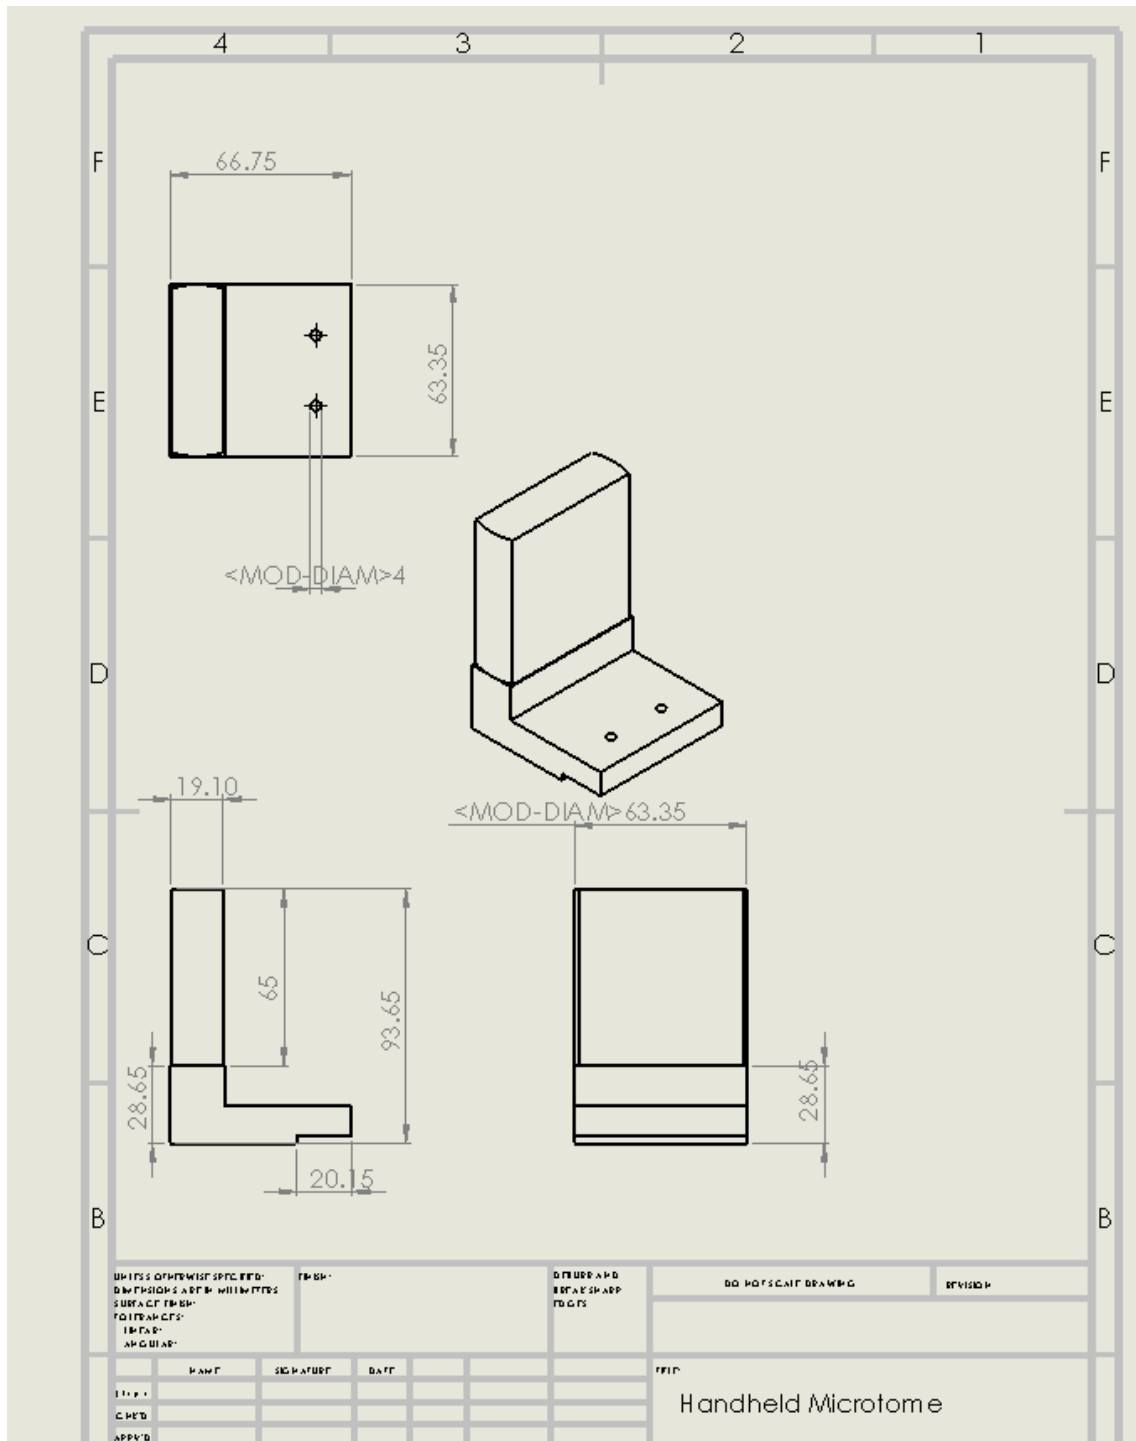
Engineering drawing for the POM handle for the handheld microtome. (Drawing made on SolidWorks)
